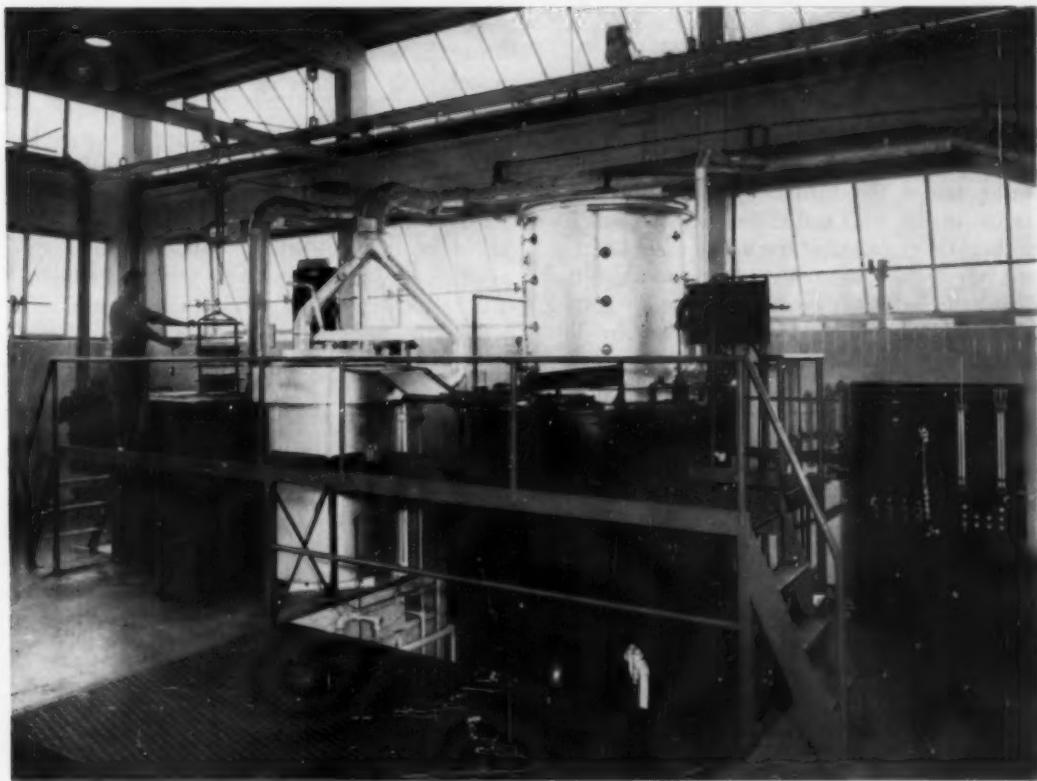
Large Screws, Studs and Bolts Are Jigged. Hardening furnace at right has entrance vestibule in front (dark portion). Fixture is lowered on elevator, moved toward rear, lifted into heating chamber (light portion above), lowered into quenching bath in bottom of unit, and then retraces steps to outside. Quenching oil remaining in socketed heads is sucked out by vacuum cleaner before fixture is put into drawing furnace (light-colored unit in center)
